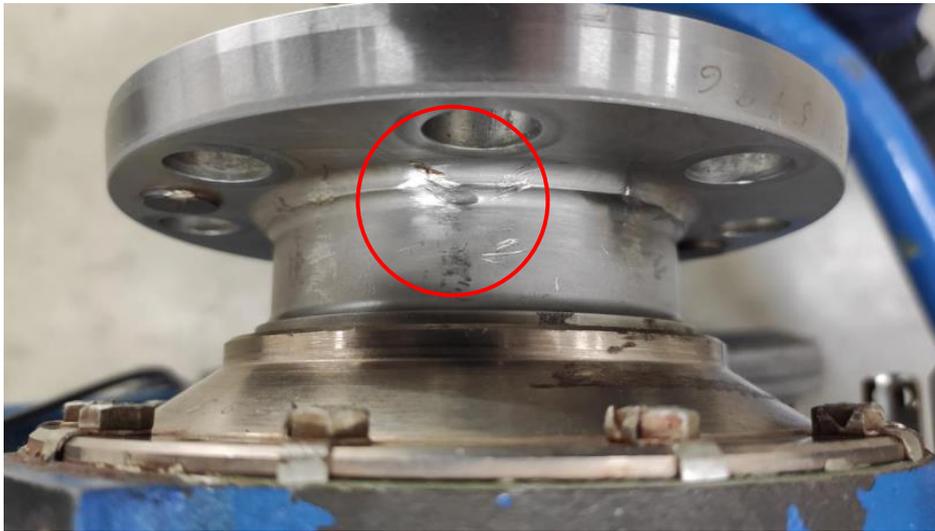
Possible damage to the propeller shaft, when using tooling improperly.
